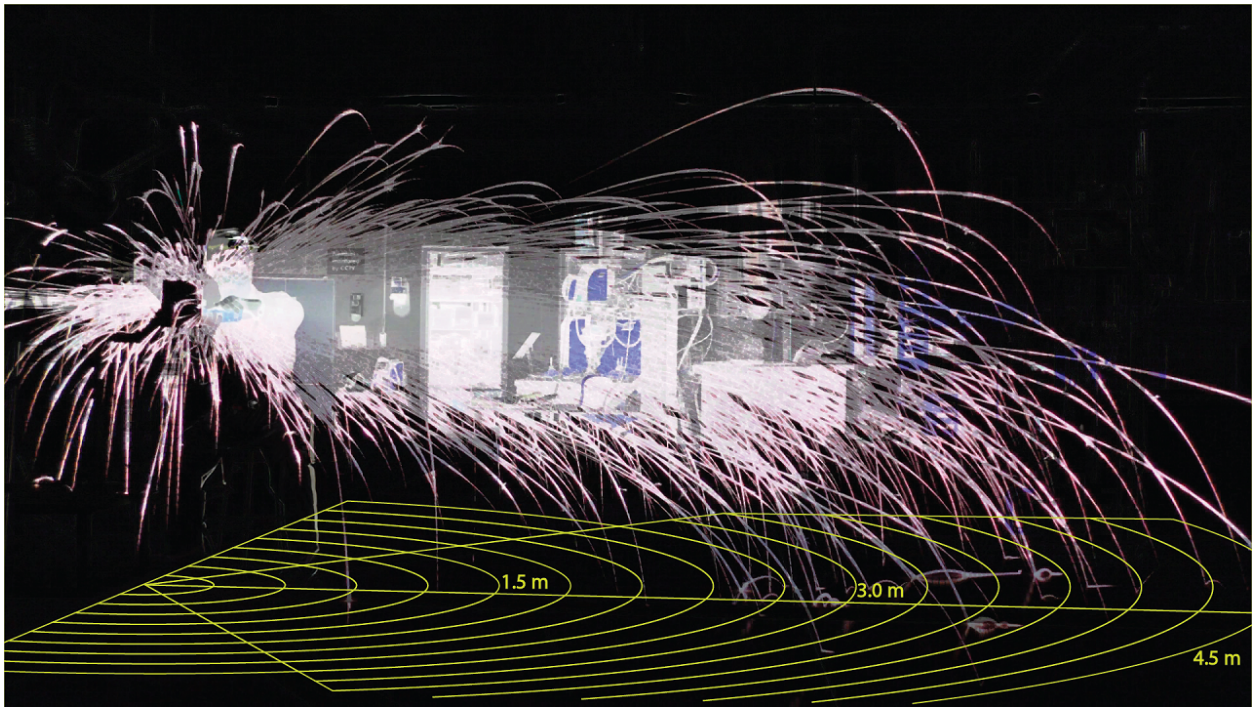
Interpass Grinding; Gas Metal Arc Welding
